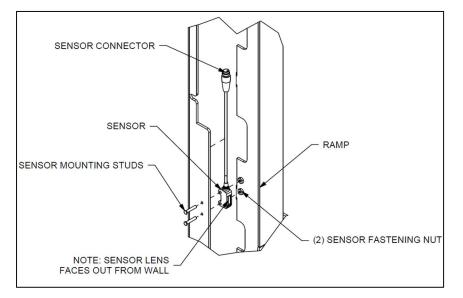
SENSOR MOUNTING TO UPPER WALL ANGLE
